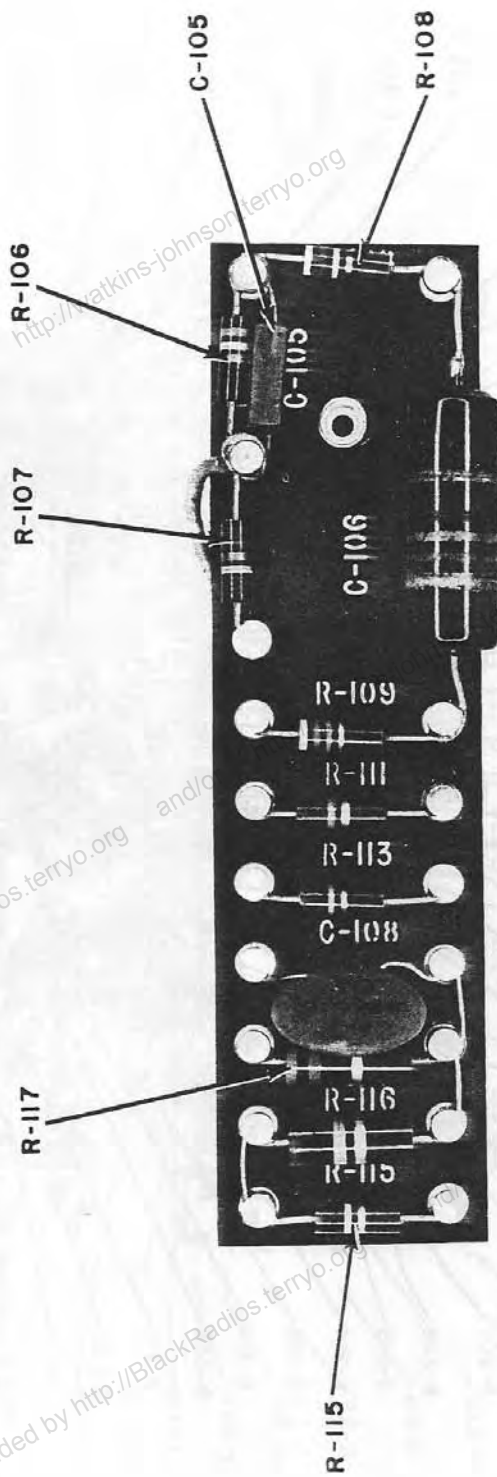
Resistor Board Used in Model 1670 Special Purpose Receivers
